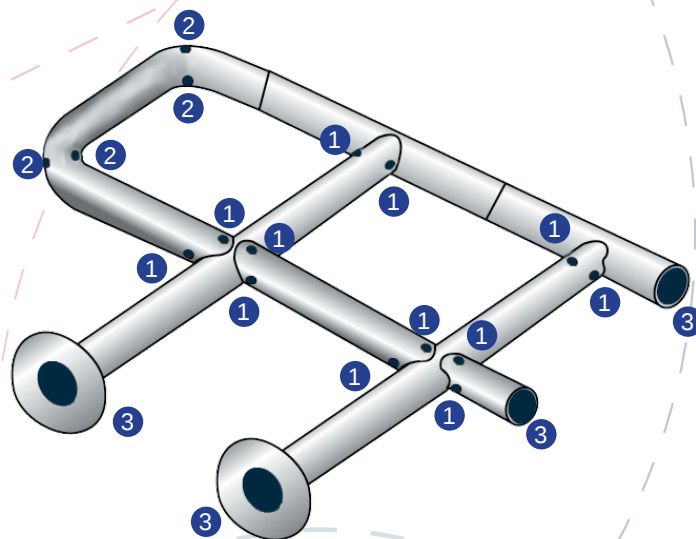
External vent holes should be visible on the outside of pipe assemblies
